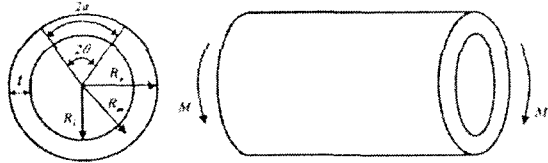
Circumferential through-wall cracked pipes under bending
